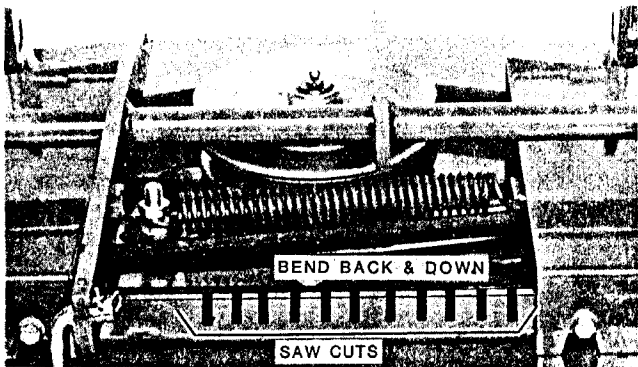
Cut and Bend Support Plate (48 in./122 cm Mower)
